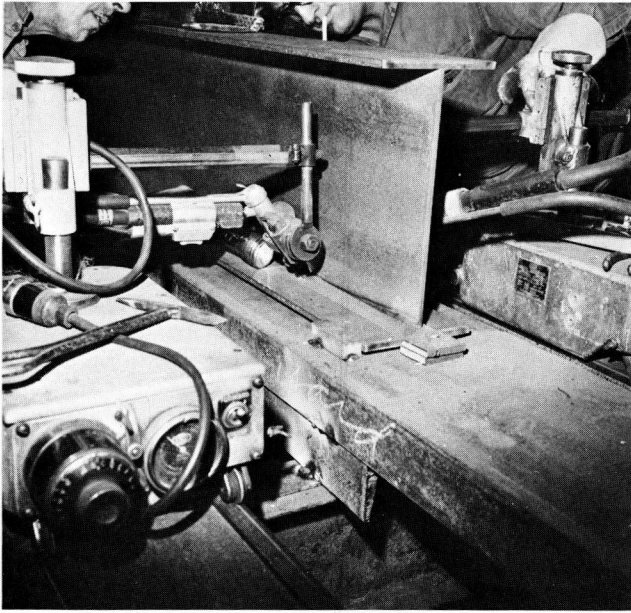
Placing automatic submerged arc web-to-flange fillet welds.
